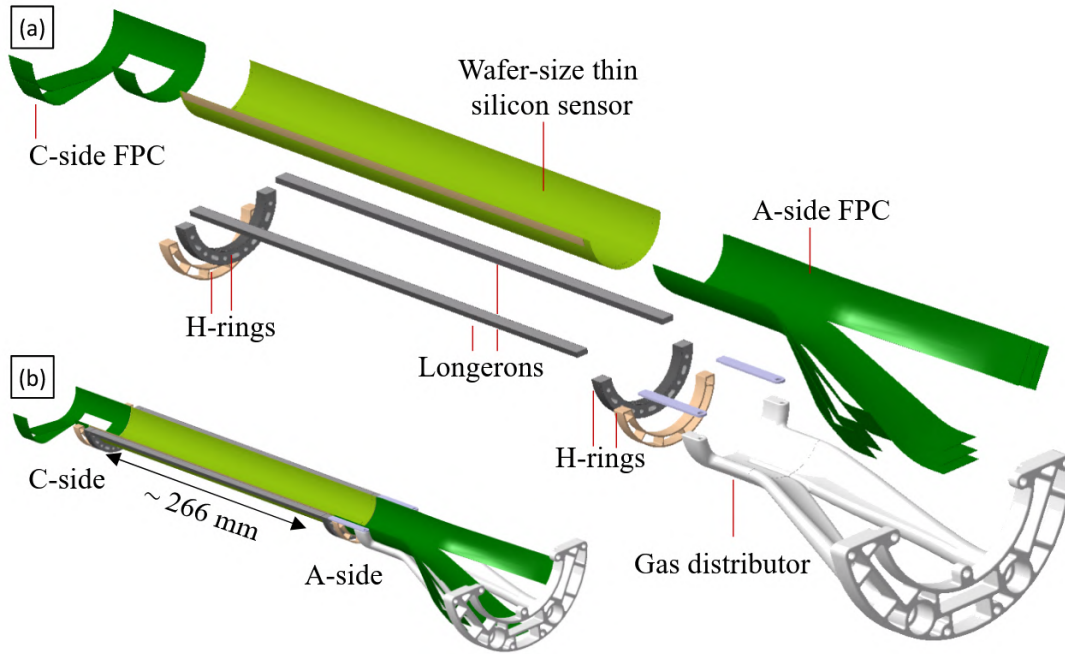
Exploded view and assembled view of an ITS3 half-layer. Figure from [40].
